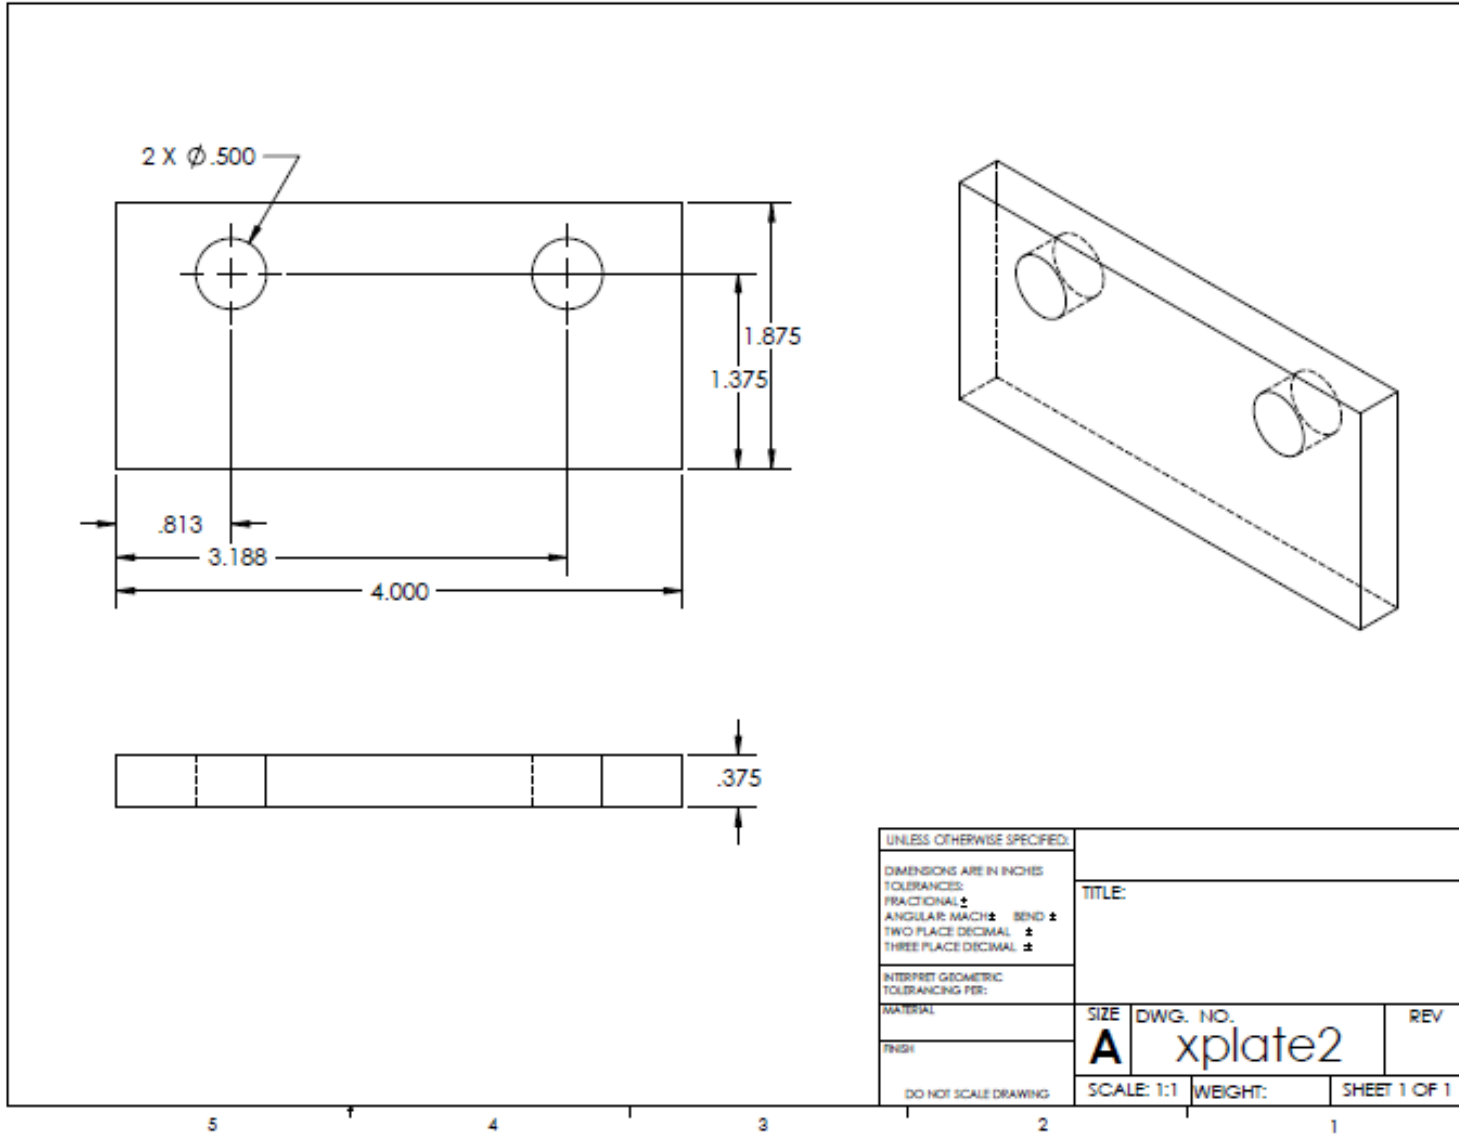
Engineering drawing of the X-axis motor mount plate #2
